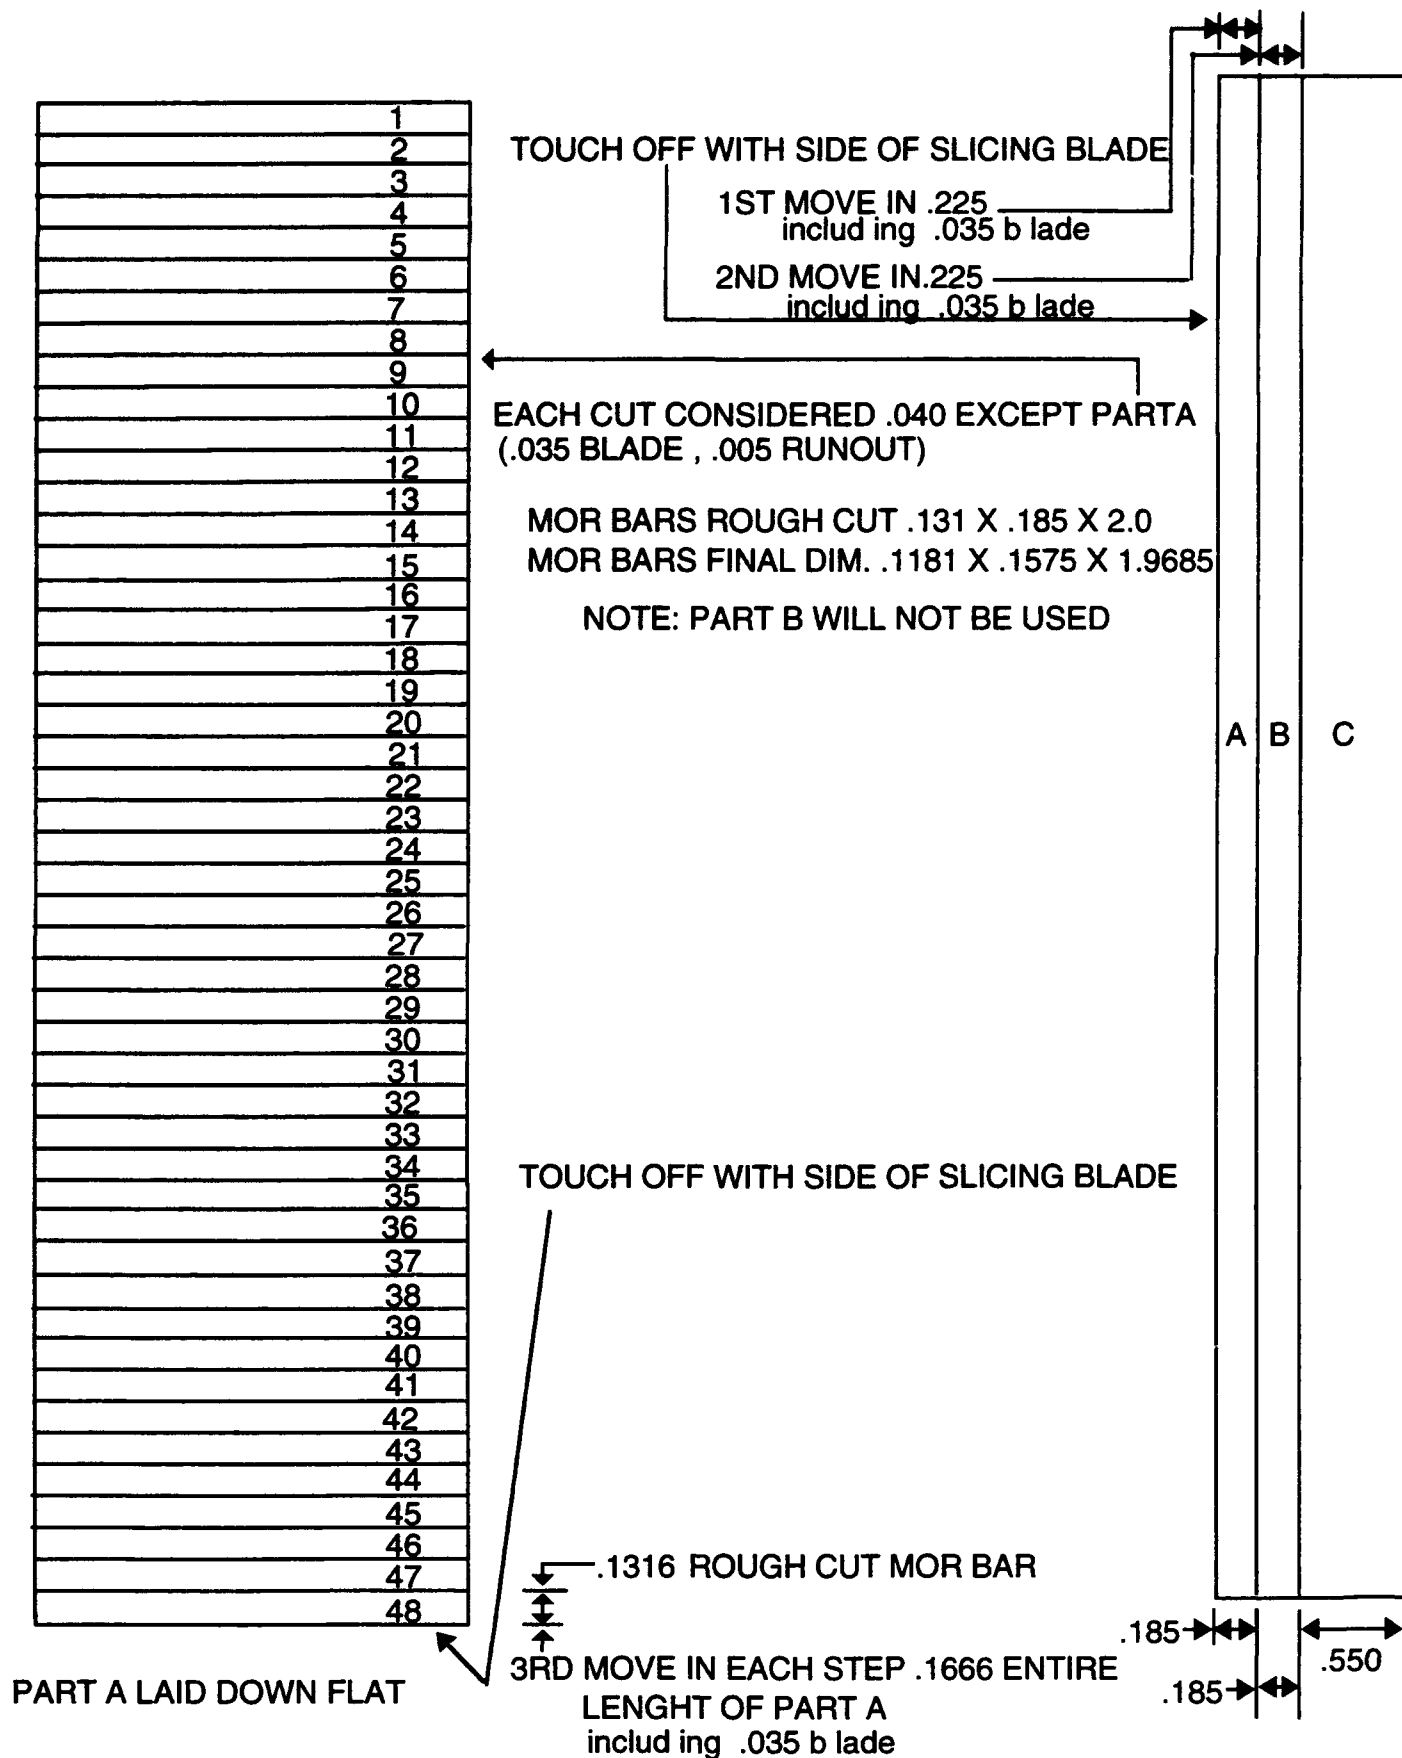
Sketch illustrating slicing paths for conversion of AL-600 alumina billets into MOR bars and cylindrical compression specimens.
